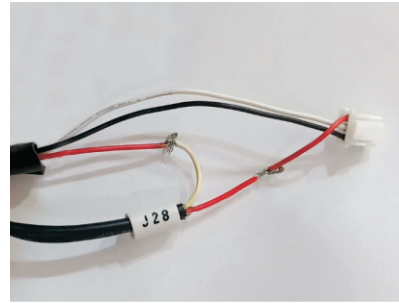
Installation Position of J28 Broken Needle Protection Sensor (Protect the Button Attaching Machine)
